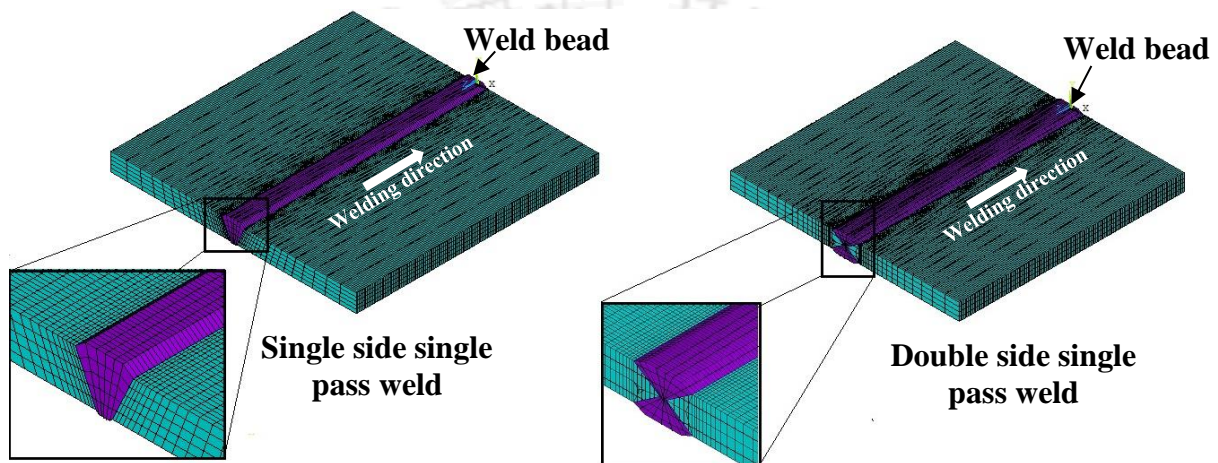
Drafted and meshed models of square butt single and double-side single pass weld joints
